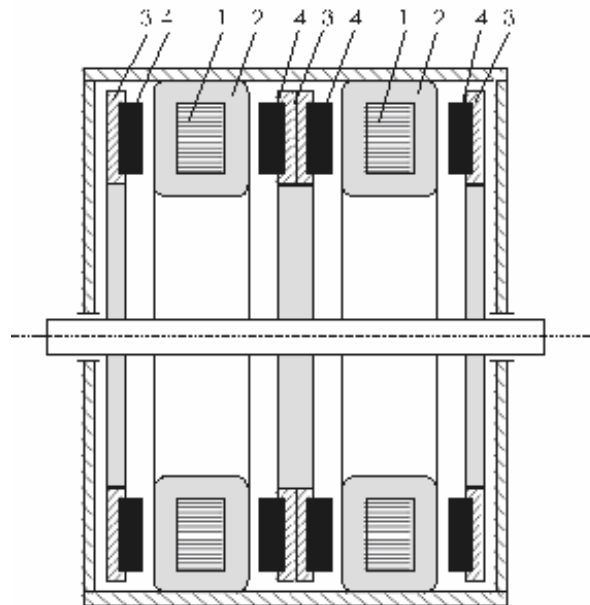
Multi-layer disc motor: 1-stator core, 2-stator winding, 3-rotor, 4-magnets [6]
